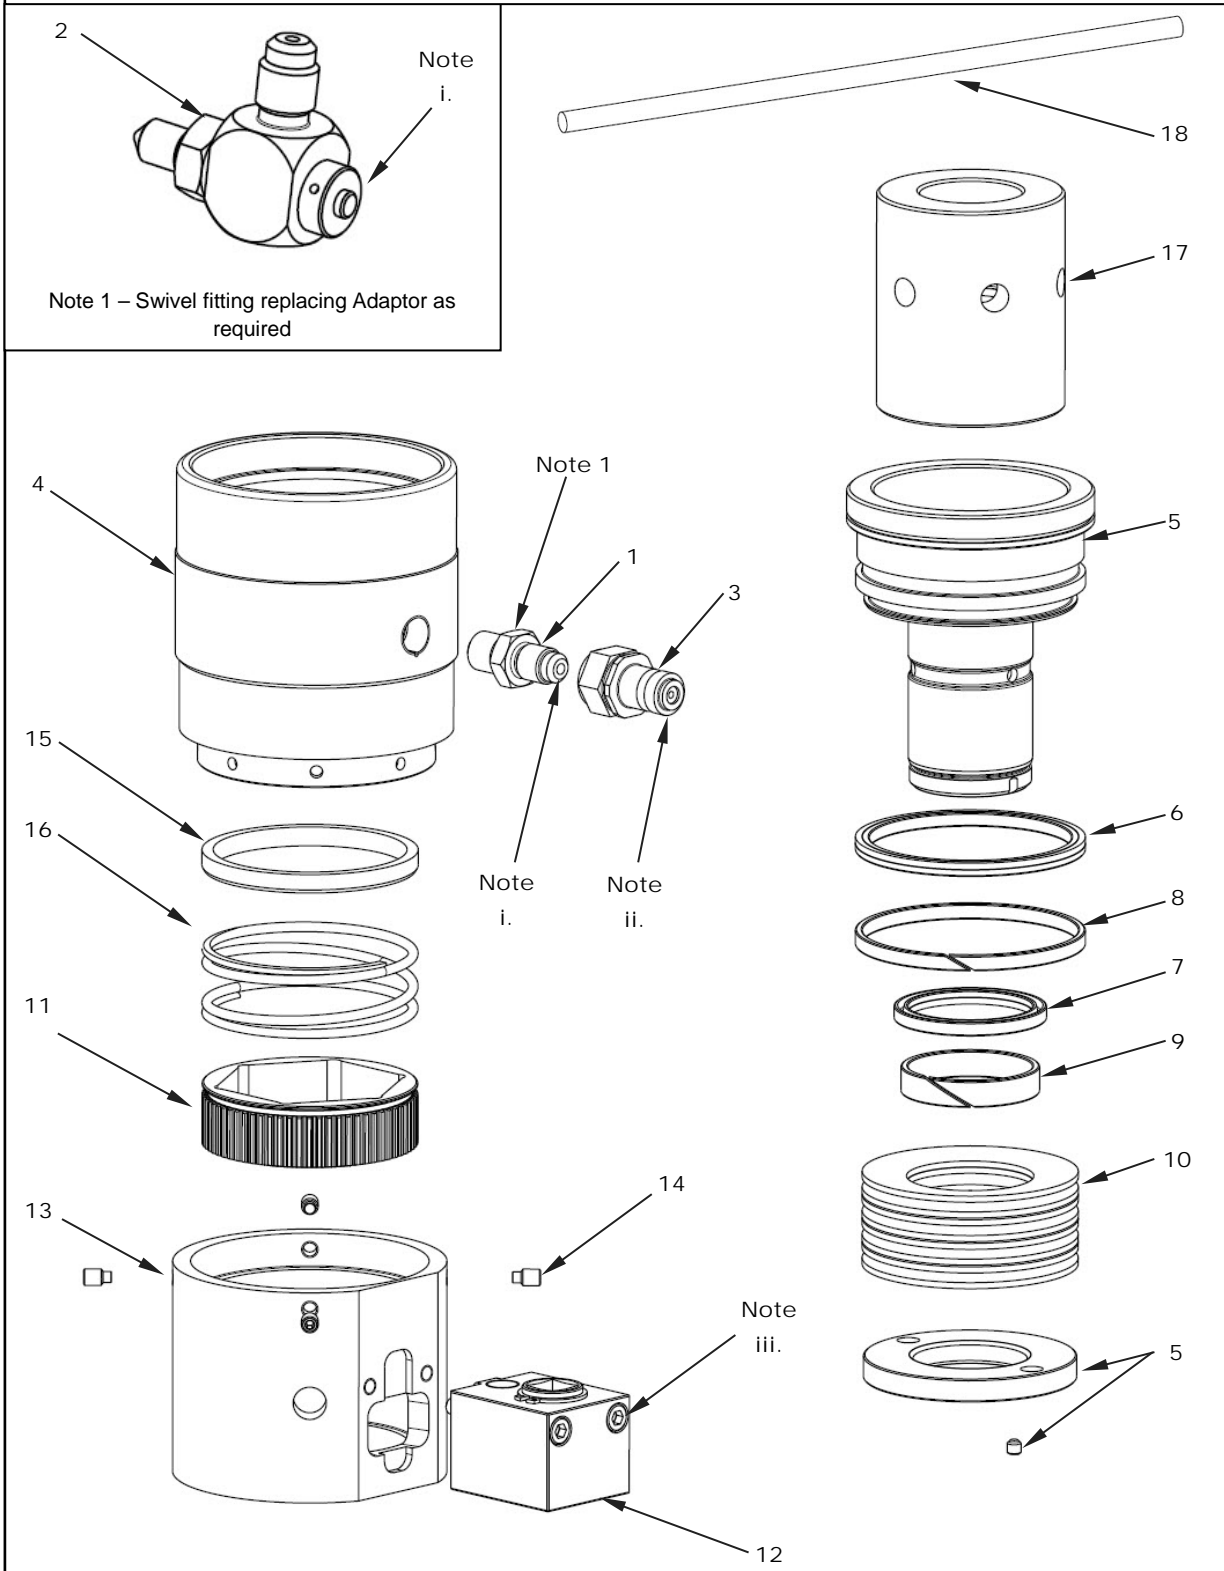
, Exploded View, FTR-Series Foundation Tensioners, Round with Gearbox Assembly
